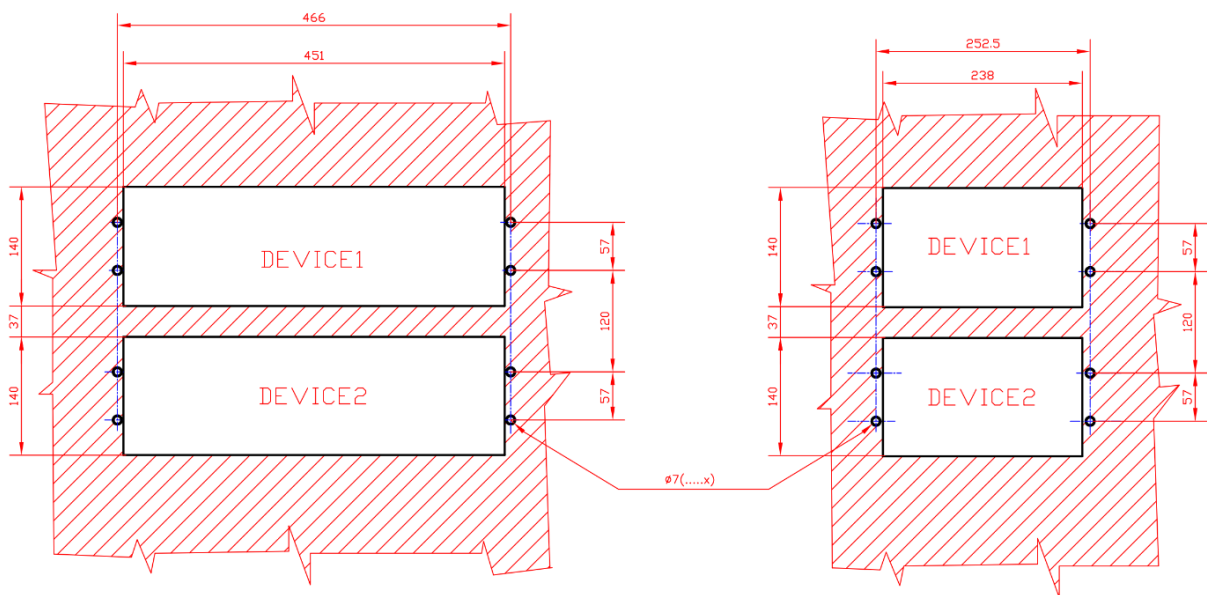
Dimensions for flush mounting of 84 HP and 42 HP single rack
